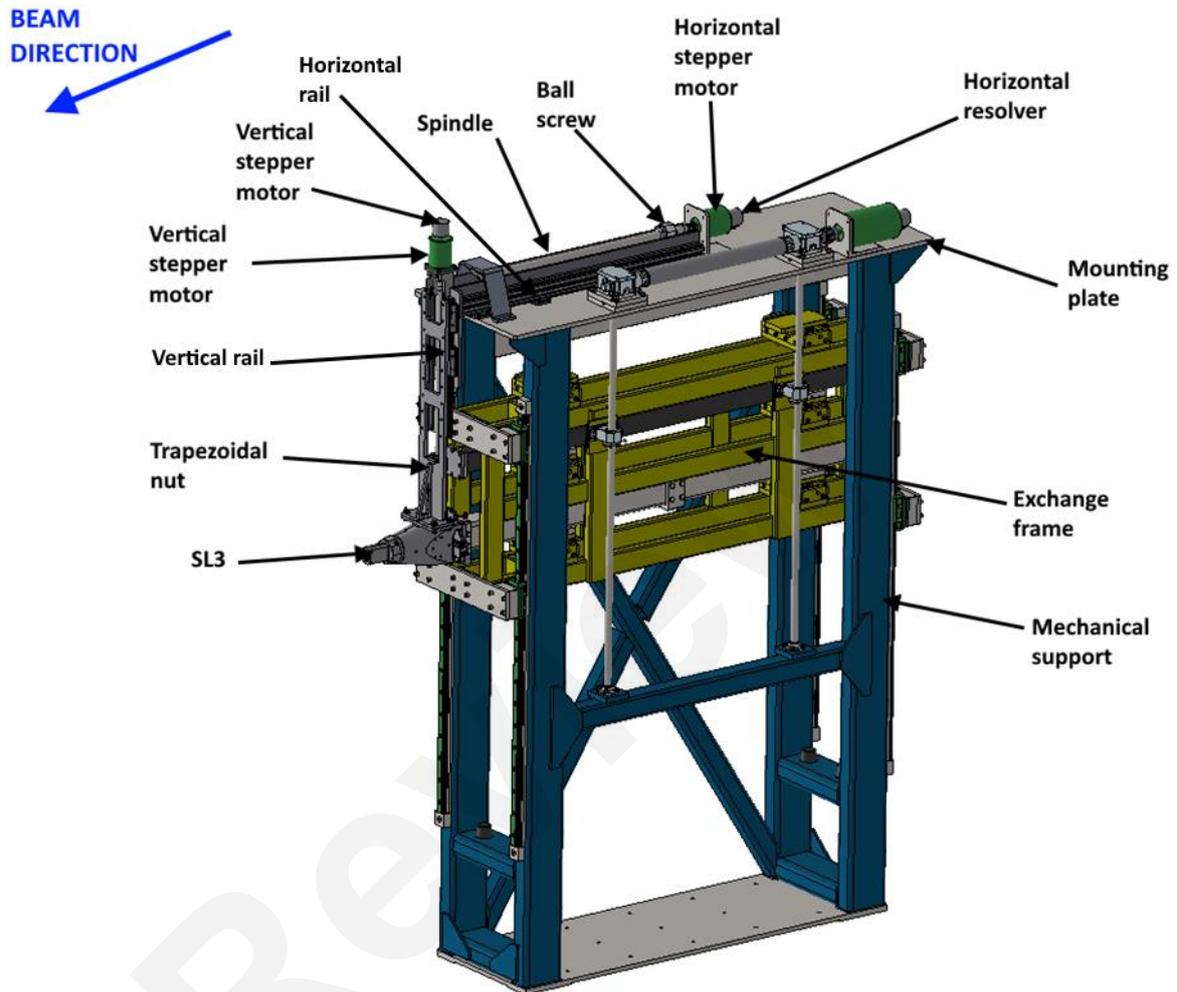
SL3 alignment mechanics mounted on the mechanical support
